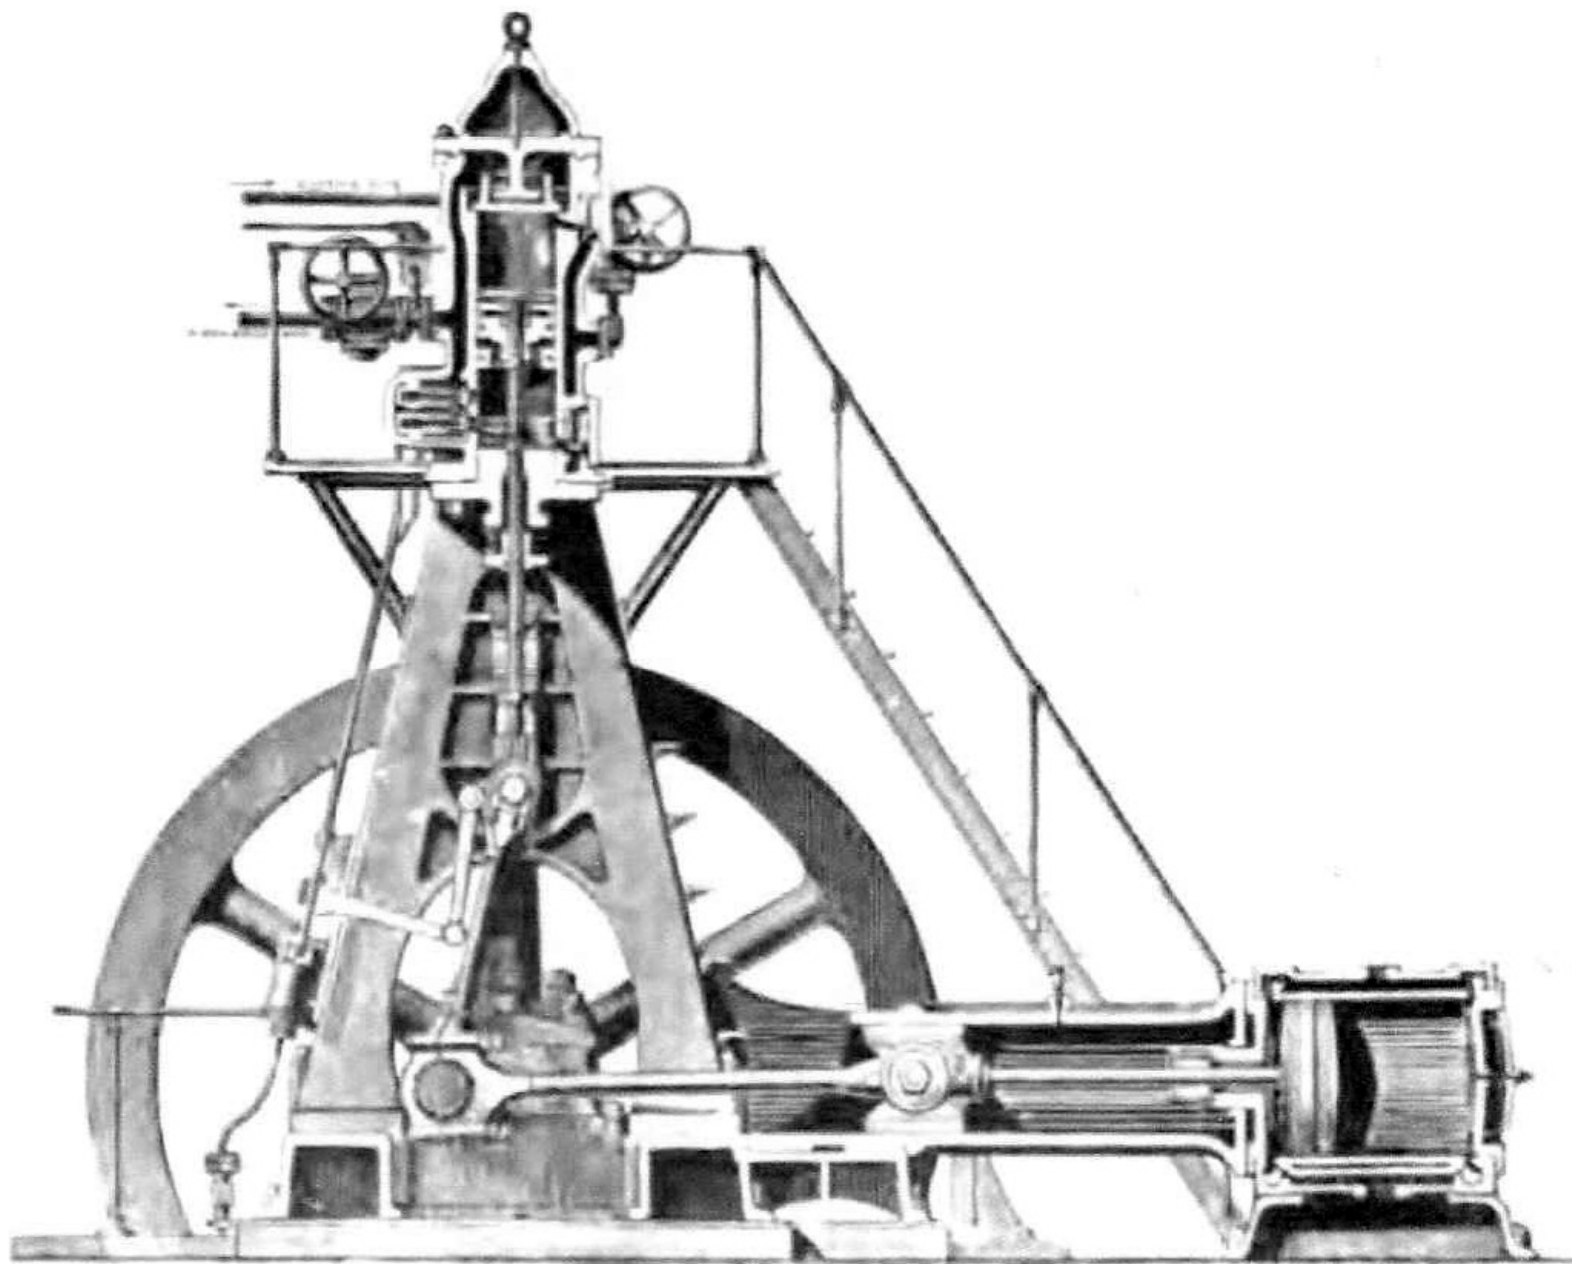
SECTION OF DE LA VERGNE ENGINE AND COMPRESSOR.
